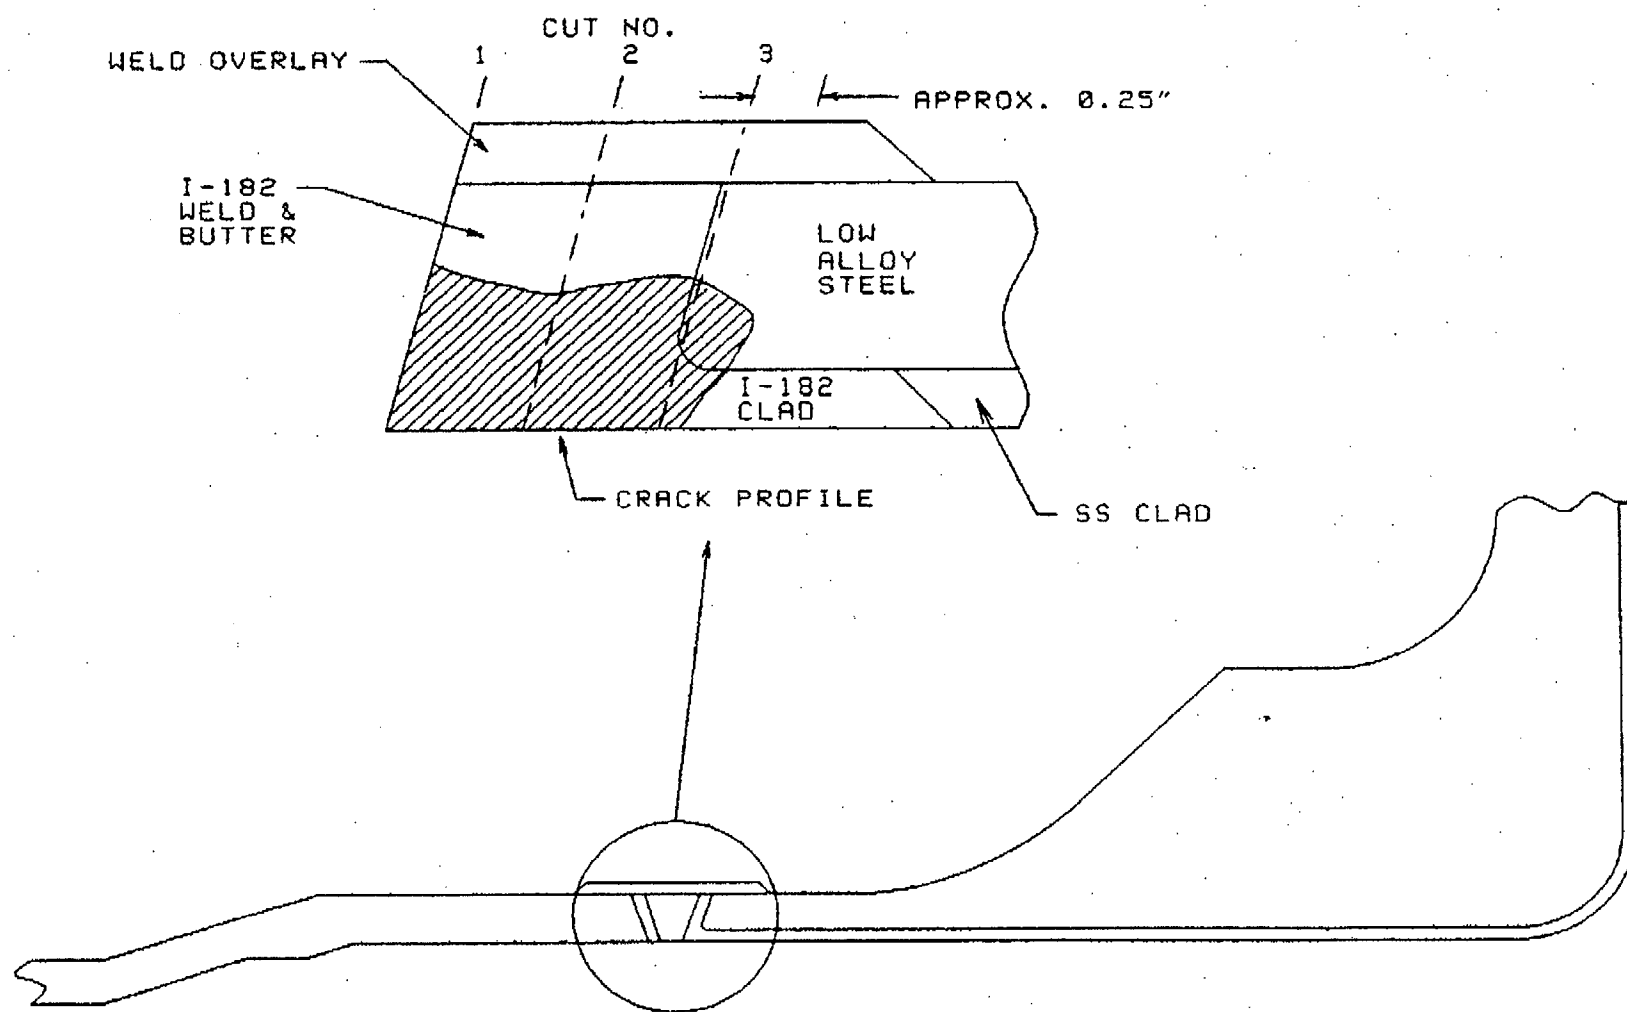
Typical Location of Ultrasonic Inspection Indications in Nozzle/Safe-end Weldment at Brunswick Unit 1 before Weld Repair [3-10]
